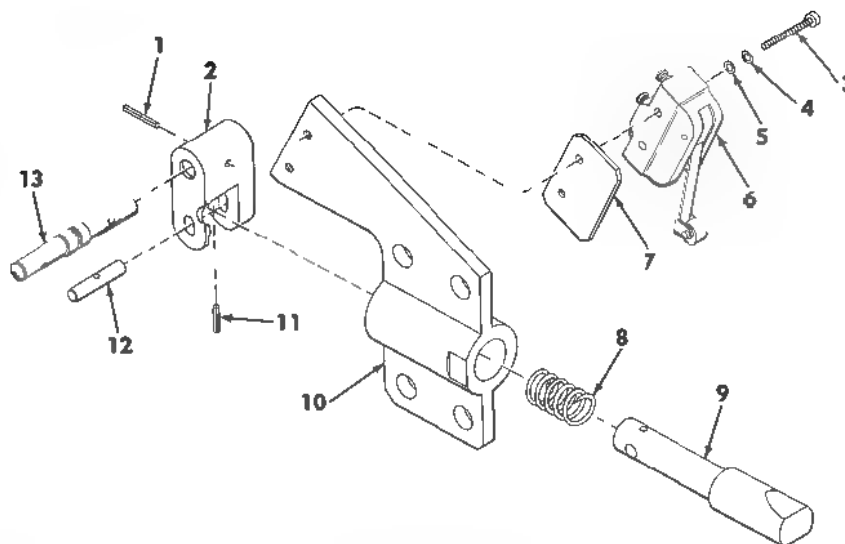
FASTENER, FLAP /8517818 AND 8517911/-EXPLODED VIEW
